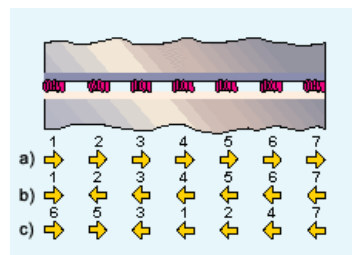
Alternative procedures used for tack welding to prevent transverse shrinkage
